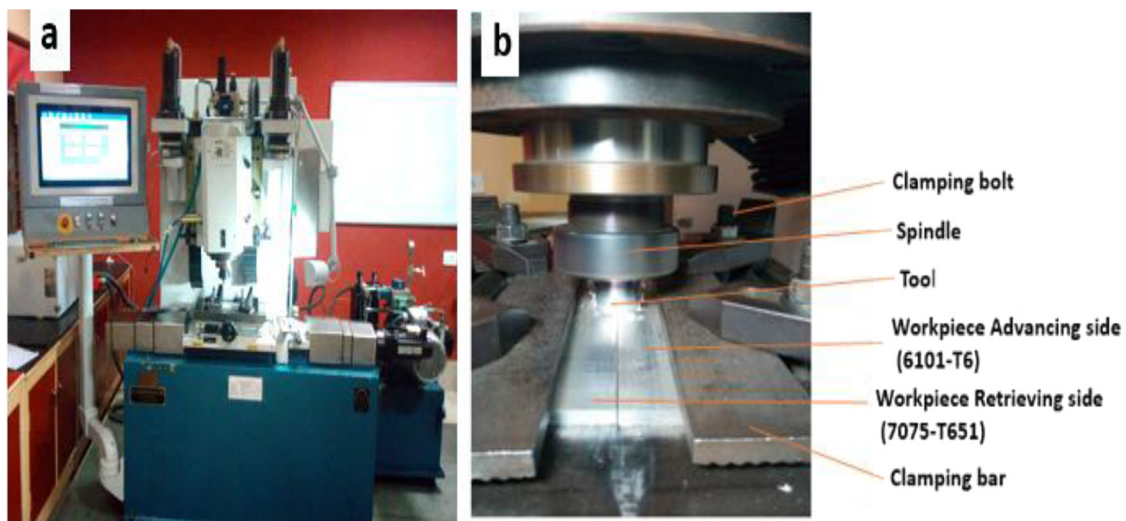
(a) Welding equipment. (b) Welding arrangement.
